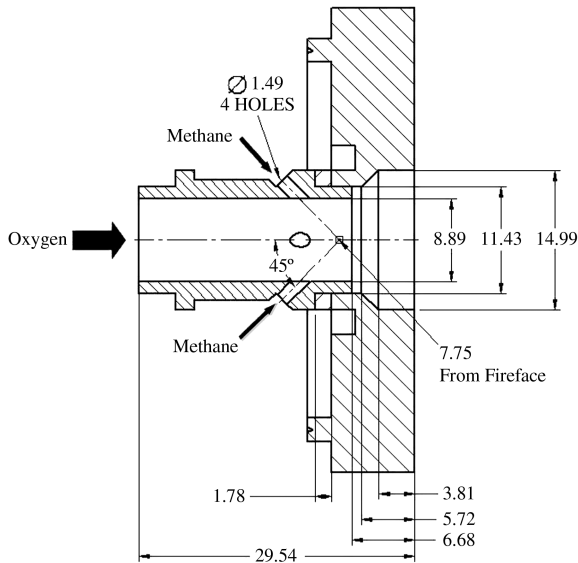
Setup of 45° impinging-jet pentad injector (units in millimeters).
